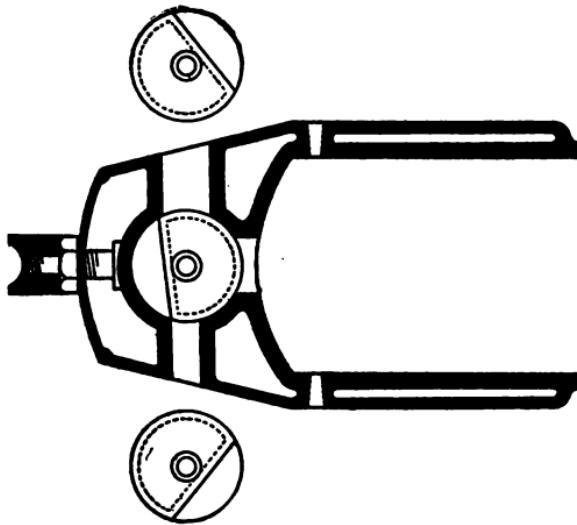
Duryea rotating cylinder valve in cylinder head, showing inlet, closed and exhaust positions.
